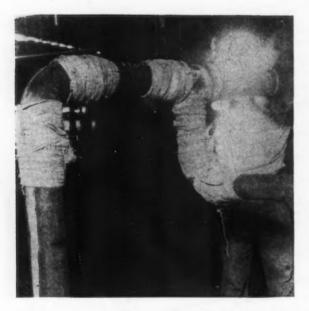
FIG I—After preheating and welding, the weld areas are heated to 1200 to 1350°F and wrapped with asbestos to a thickness of about I in. and cooled to room temperatures.
